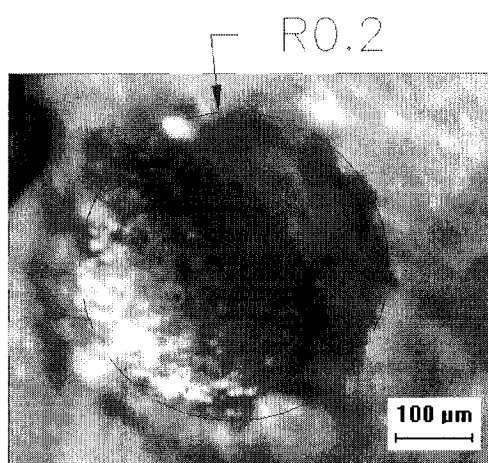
Micro-cylindrical pocket machined using DML40SI laser machine, desired radius=0.2mm, desired depth=0.3mm.
